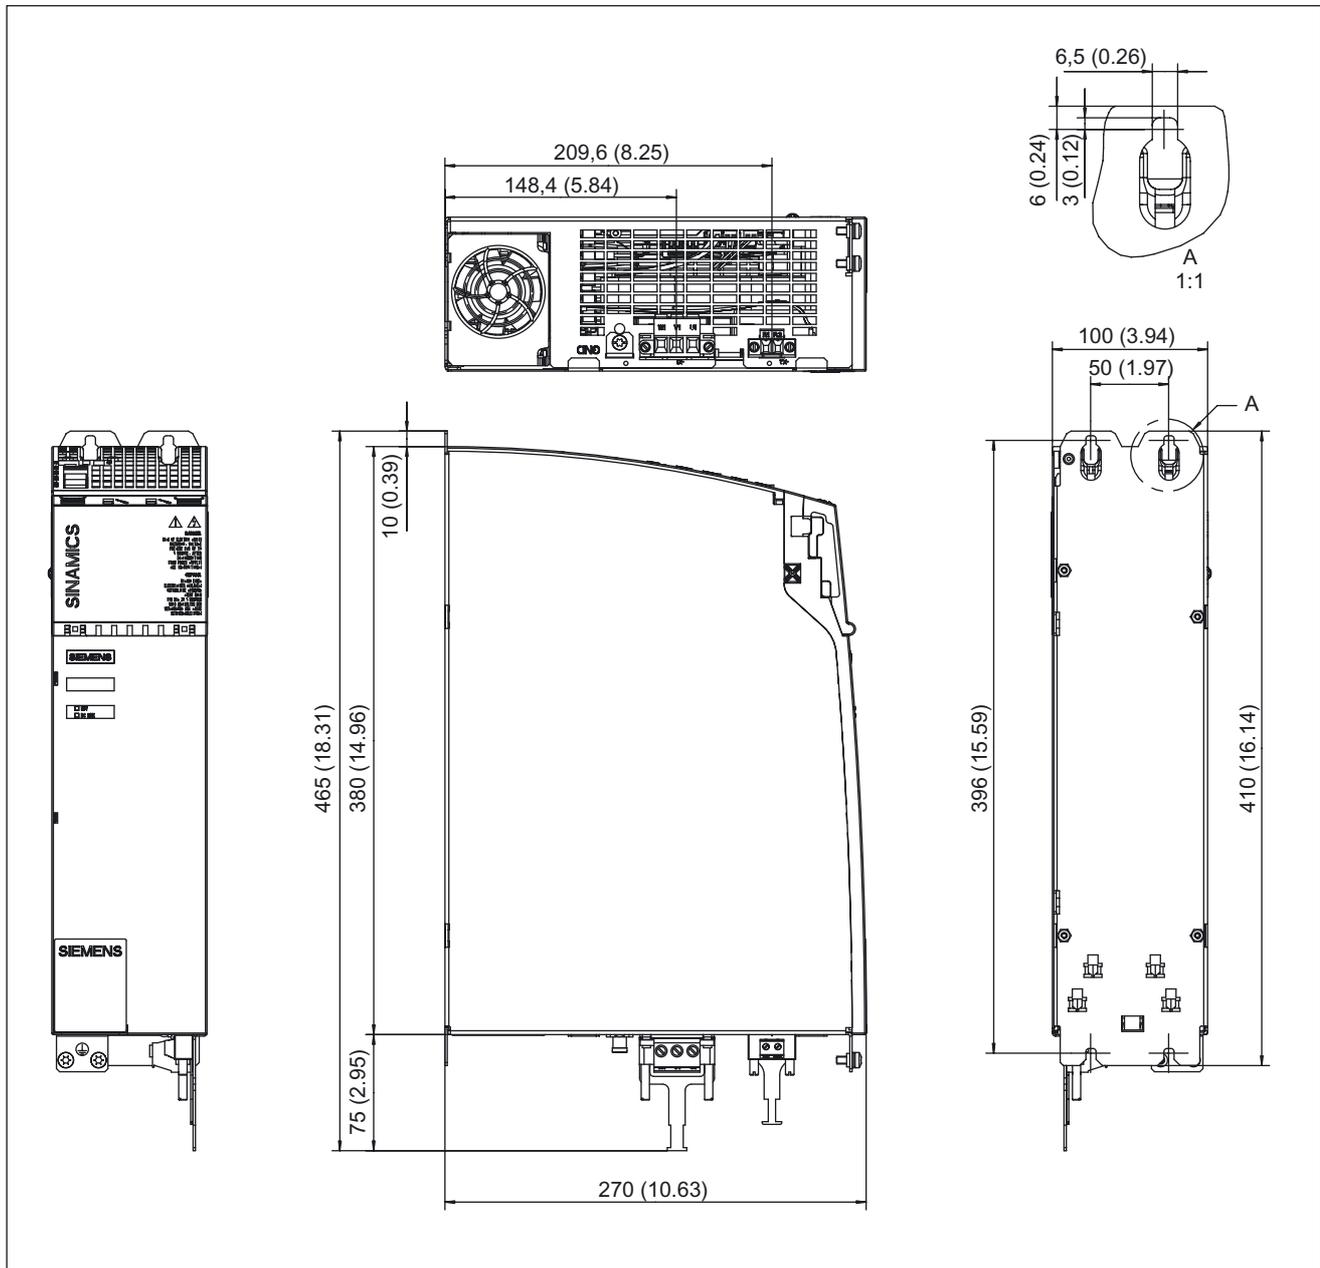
Dimension drawing of Basic Line Module 20 kW with internal air cooling, all dimensions in mm and (inches)
